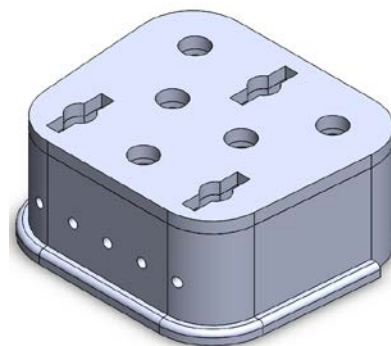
Gen 2 Gauntlet Tensioning Mechanism; Isometric View
